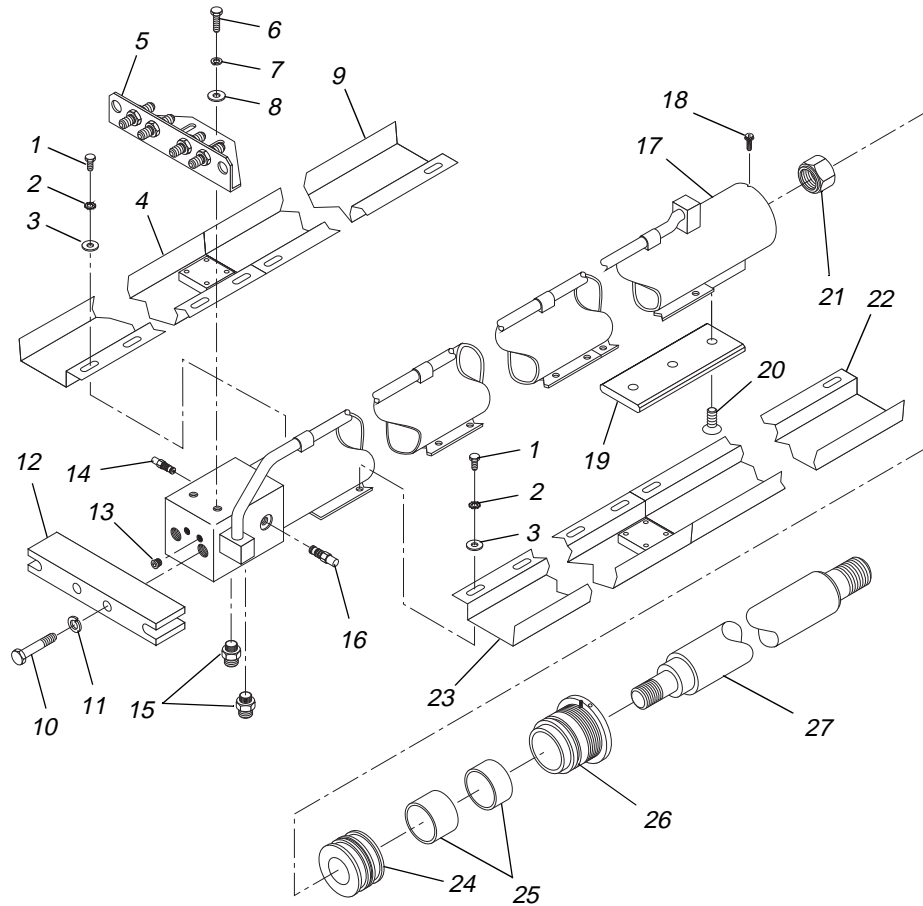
Rear Boom Extension Cylinder Mount Support
